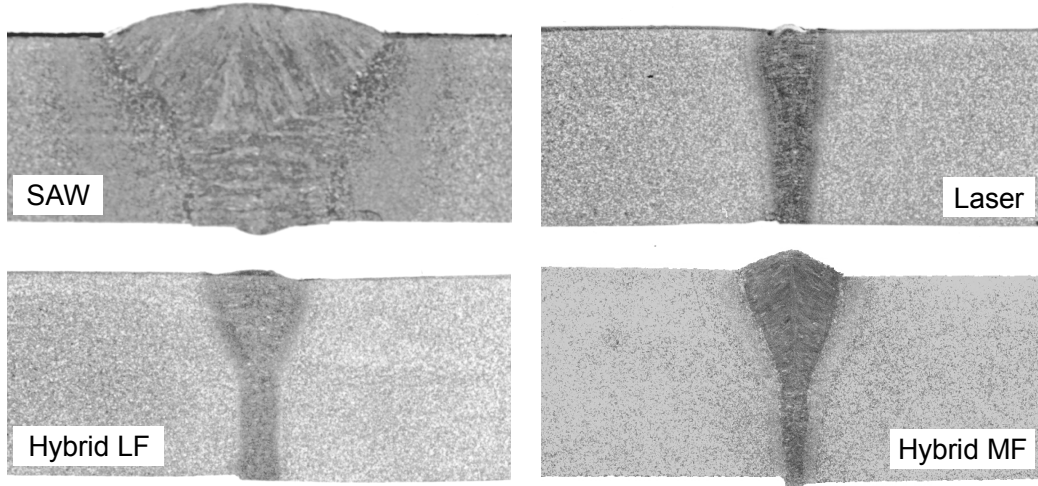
Macrographs of joints welded with different welding methods.
